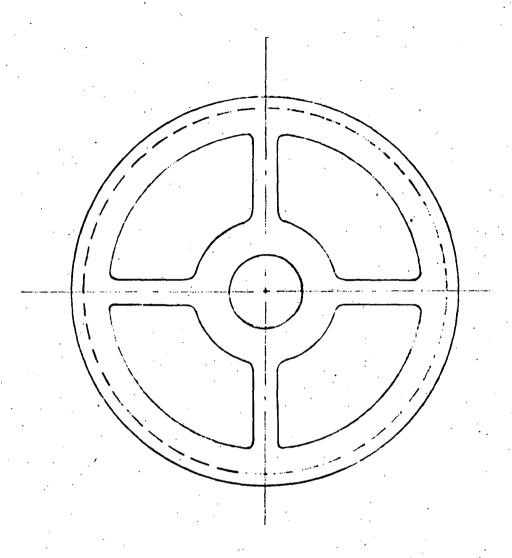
TOP VIEW OF SPECIMEN CYLINDER
